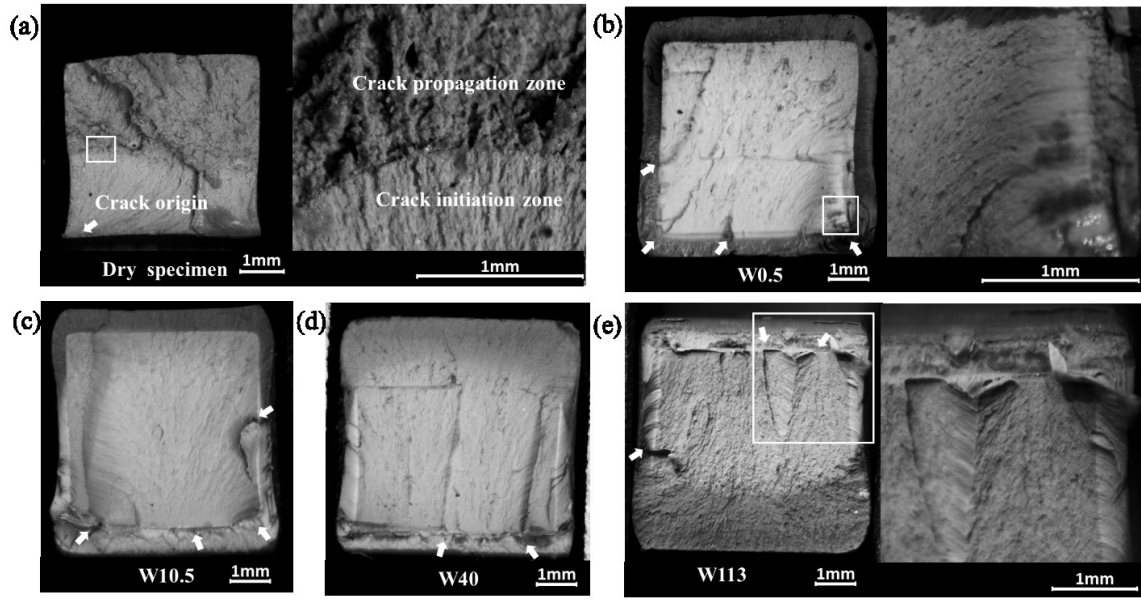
Photographs of fracture surfaces from (a) dry specimen, (b) W0.5, (c) W10.5, (d) W40, and (e) W113
